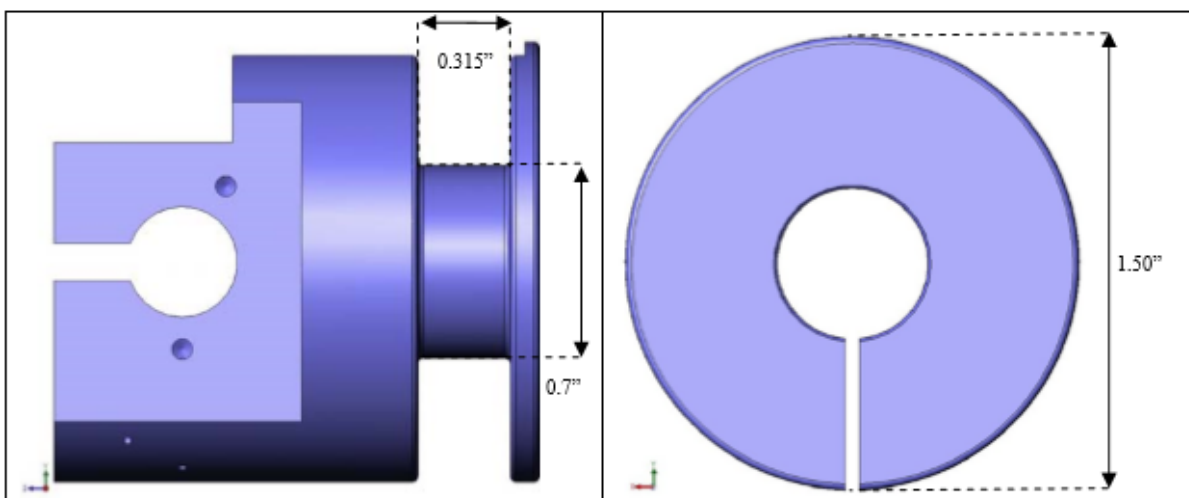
Actuator coil-former geometry. (Left) Profile of coil-former. (Right) Front face of coil-former
